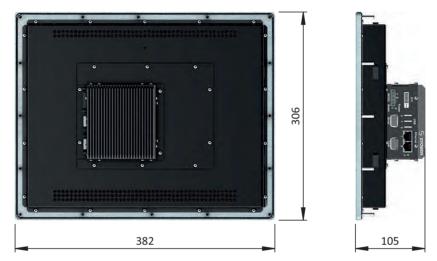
MC6x11 dimensions, hardware version 1 with 15" touch panel
